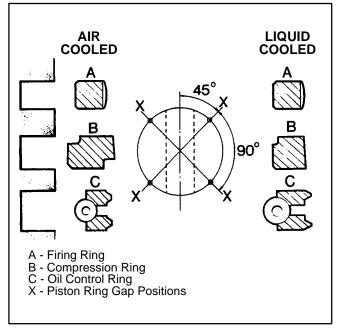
PISTON RING AND GAP LOCATIONS
